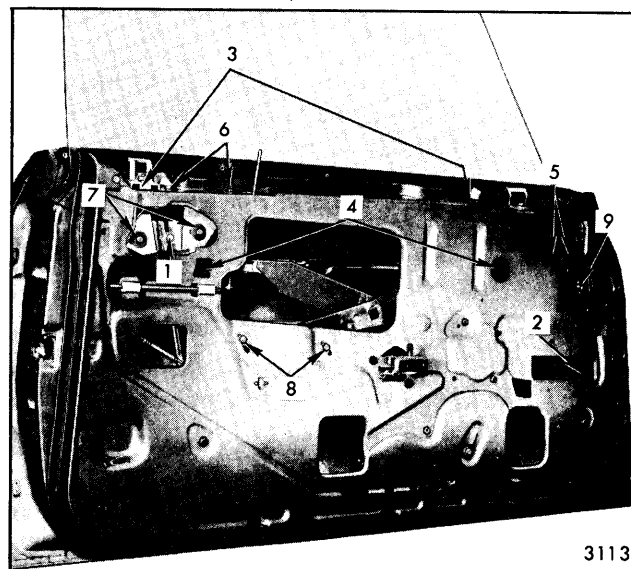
Front Door Window Removal and Adjustment - "A-37, 67 and 87" Styles and "G-57" Styles
